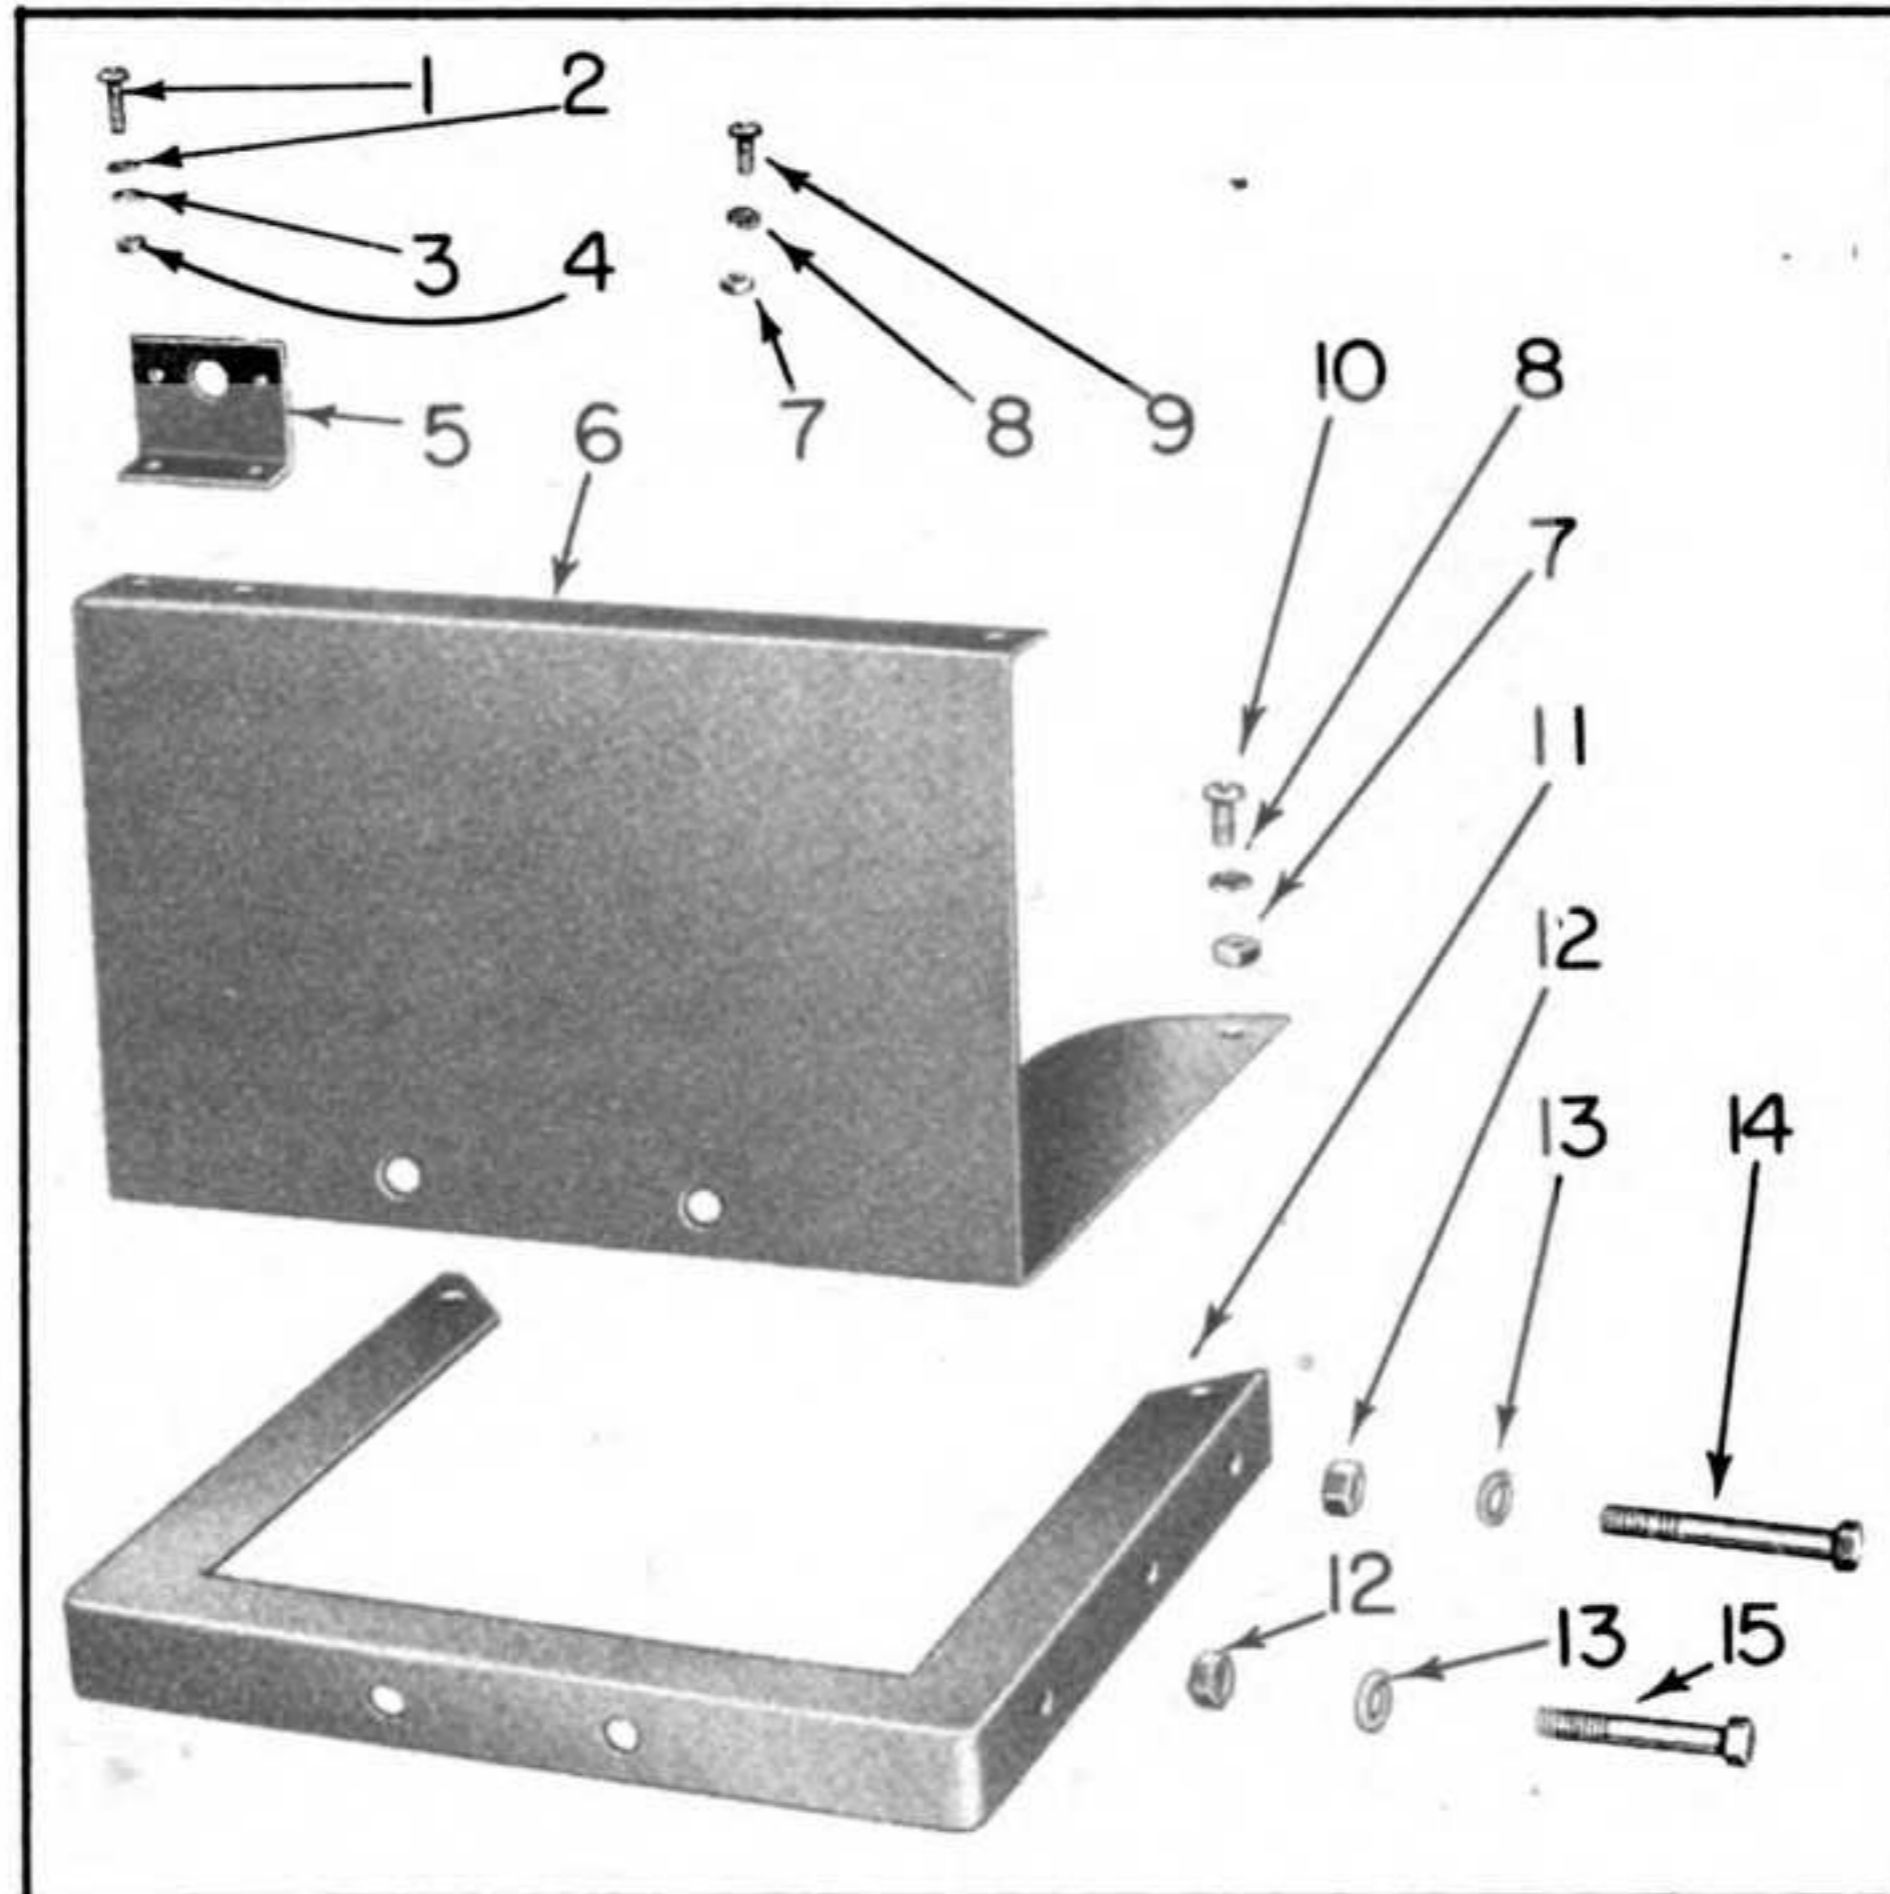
1704 TOOL BOX ASSEMBLY
